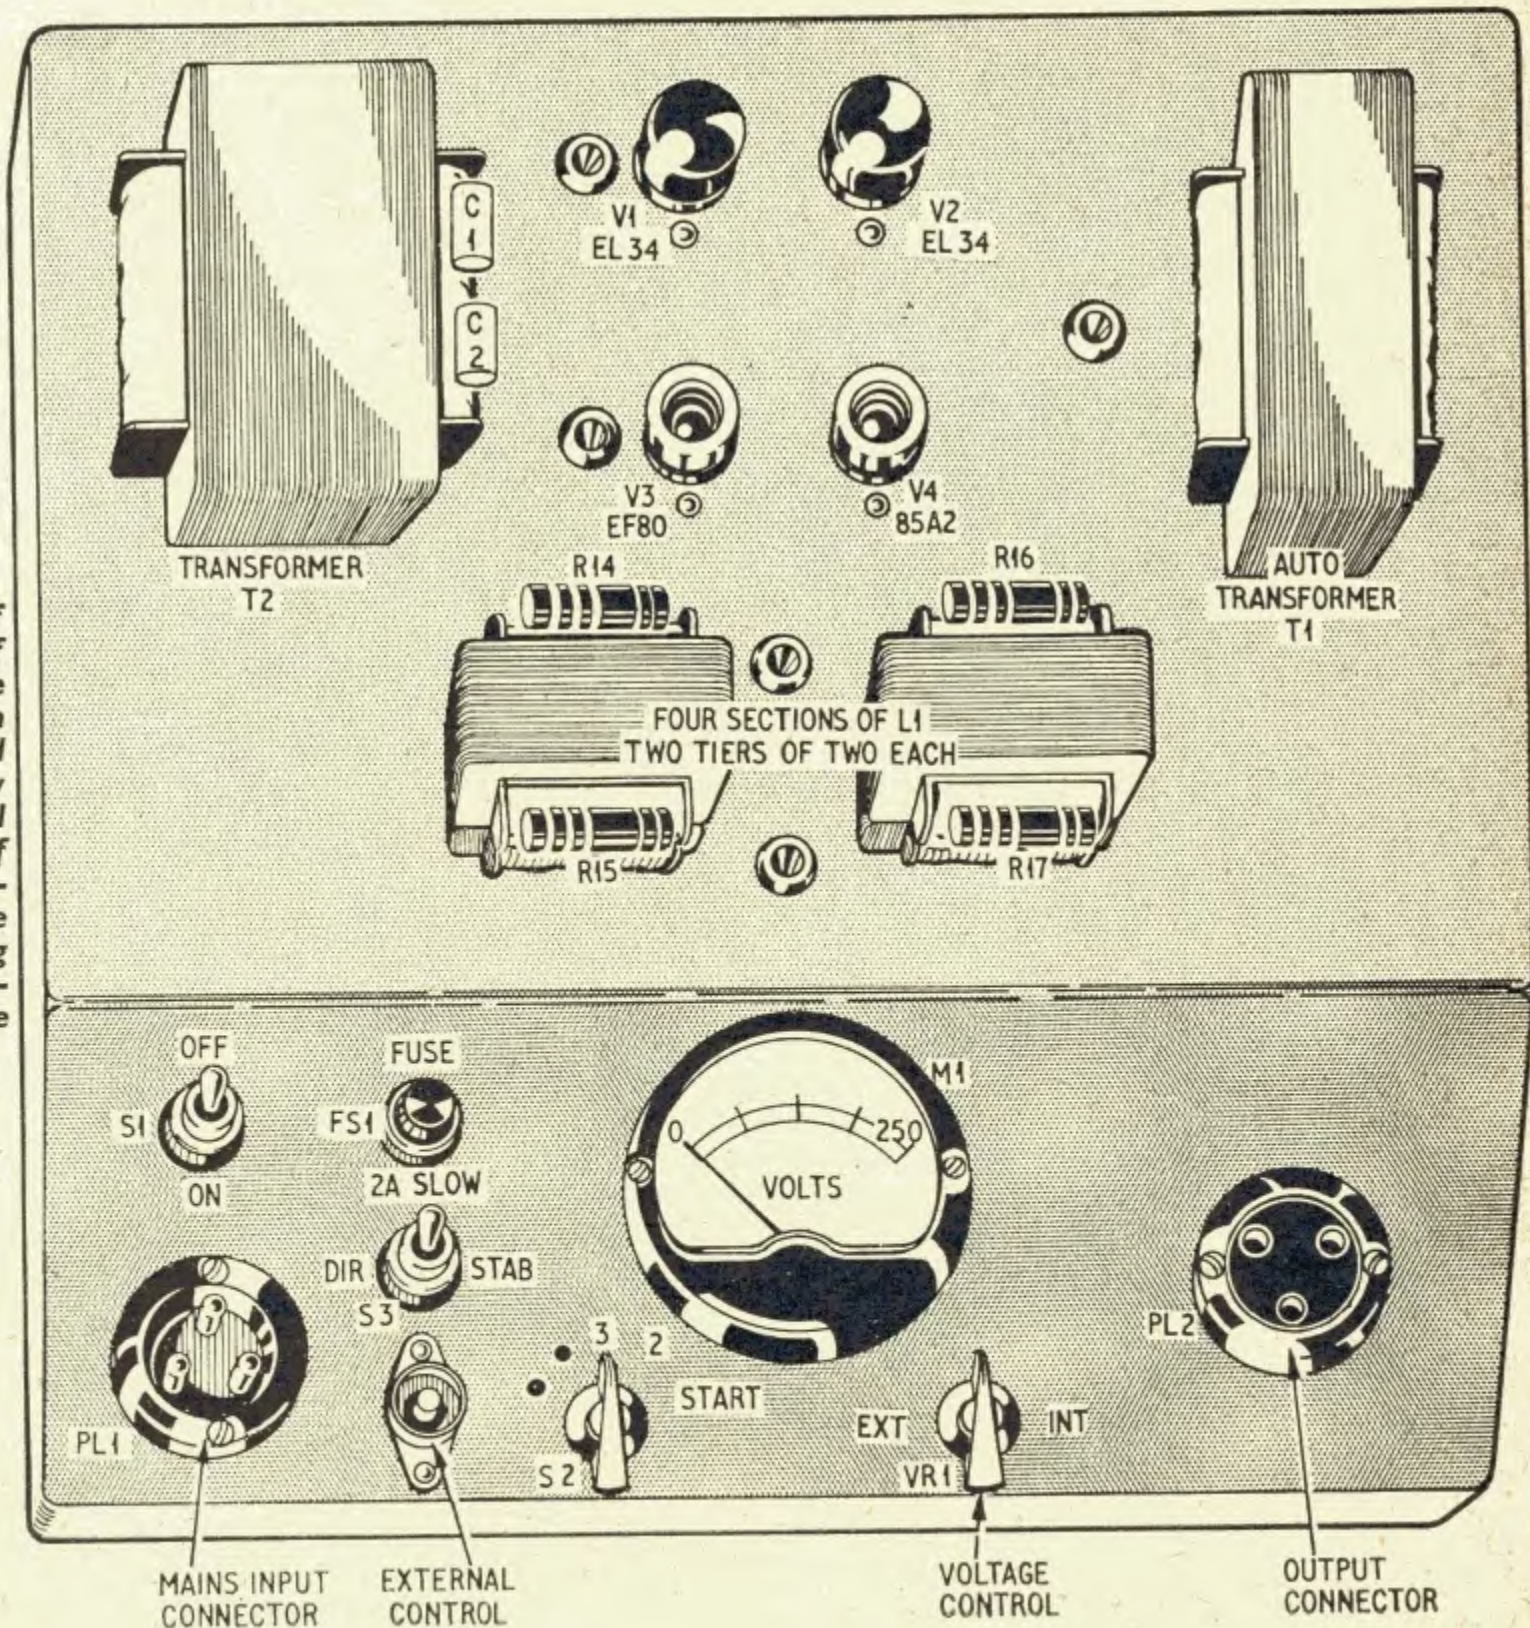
Top view of chassis, showing layout of major components. In the prototype, the rear section is covered by a perforated metal hood, leaving only the sloping control panel exposed. The bottom of the chassis should be enclosed by a metal plate affixed with self-tapping screws and carrying rubber dome feet in the corners
